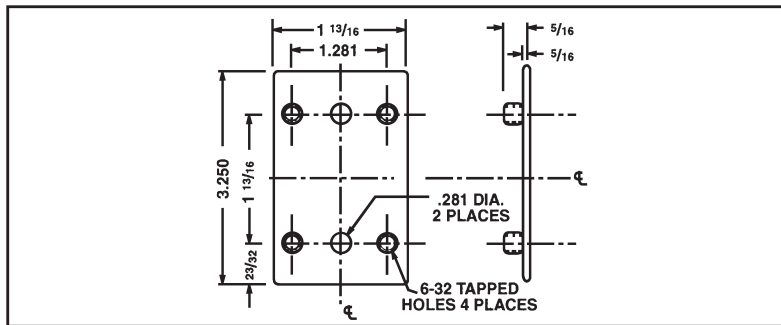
TX90-BR Mounting Bracket (Dimensions in inches)
